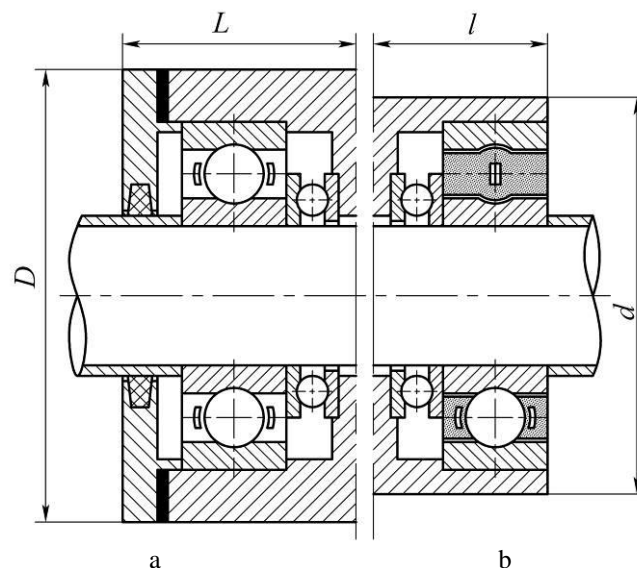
Comparative dimensions of the screw support units of augers: (a) with standard bearings; (b) with AFZ bearings
